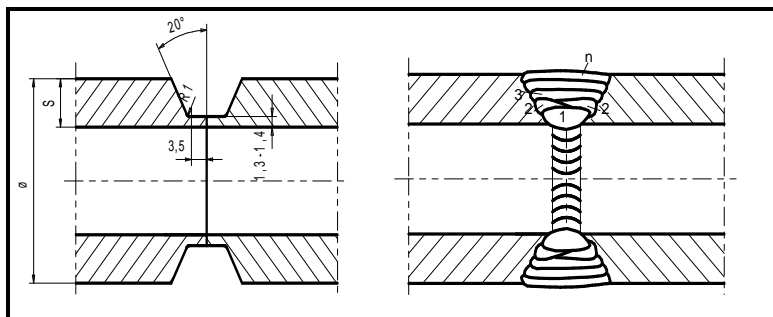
Preparation details for welding of butt welded joints using the 141Aut method and the sequence of the welding process [8].
